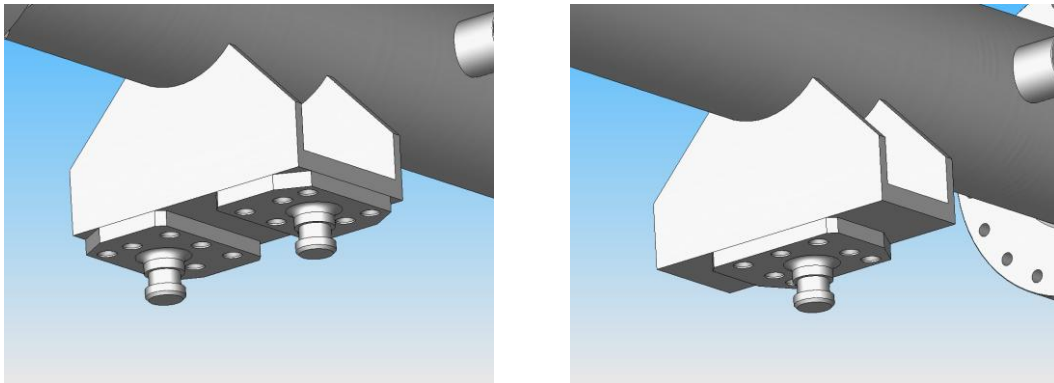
Three male supports attached to the CTF3 kicker flat surfaces
